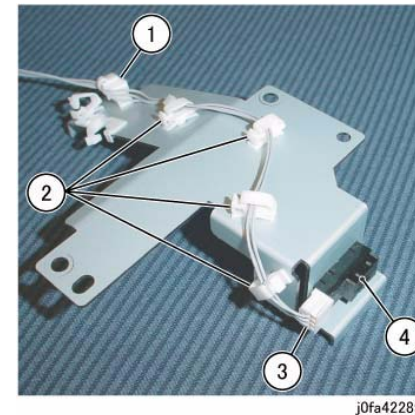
Removing the Stack Height Sensor (j0fa42289)
